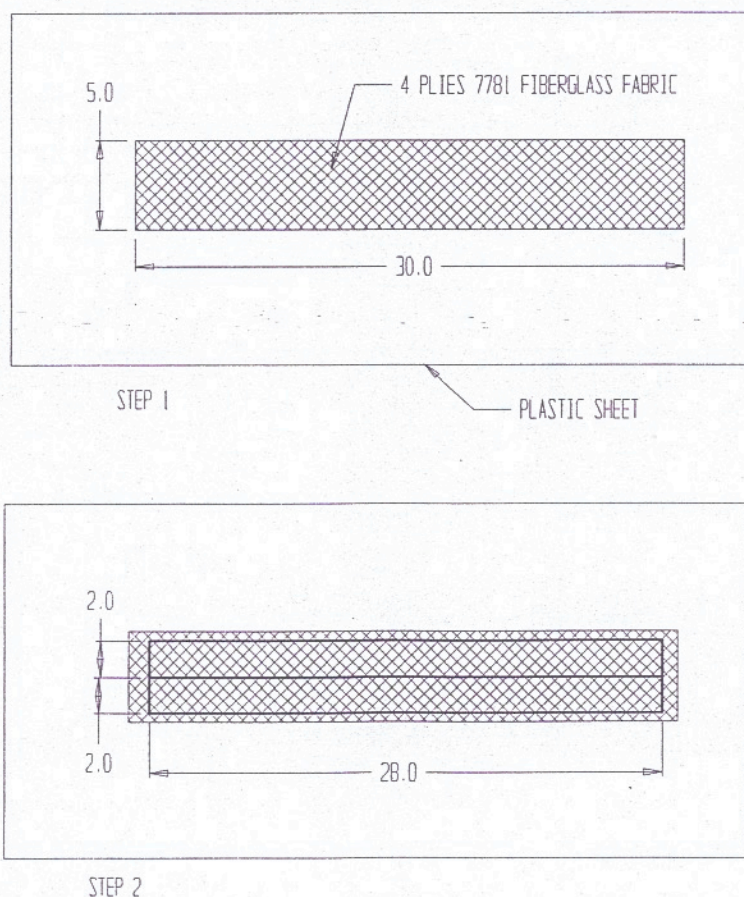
Preparation of the fiberglass strips includes wetting out four plies of fabric on plastic sheet, top, and then covering the lay-up with a second plastic sheet and cutting out the two strips, bottom.
